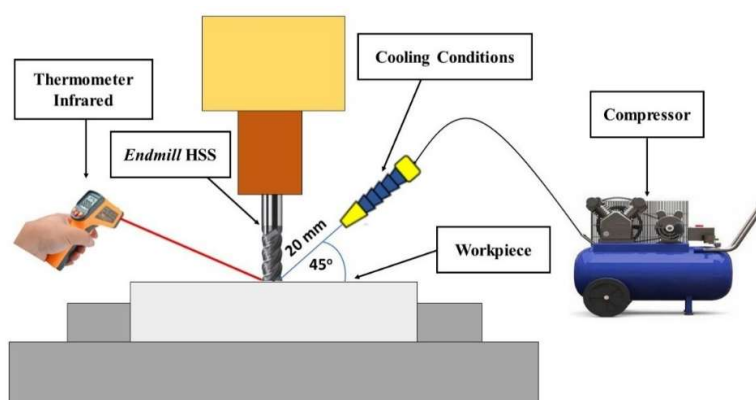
Illustration of the milling machine, coolant delivery system, and infrared thermometer positioning
